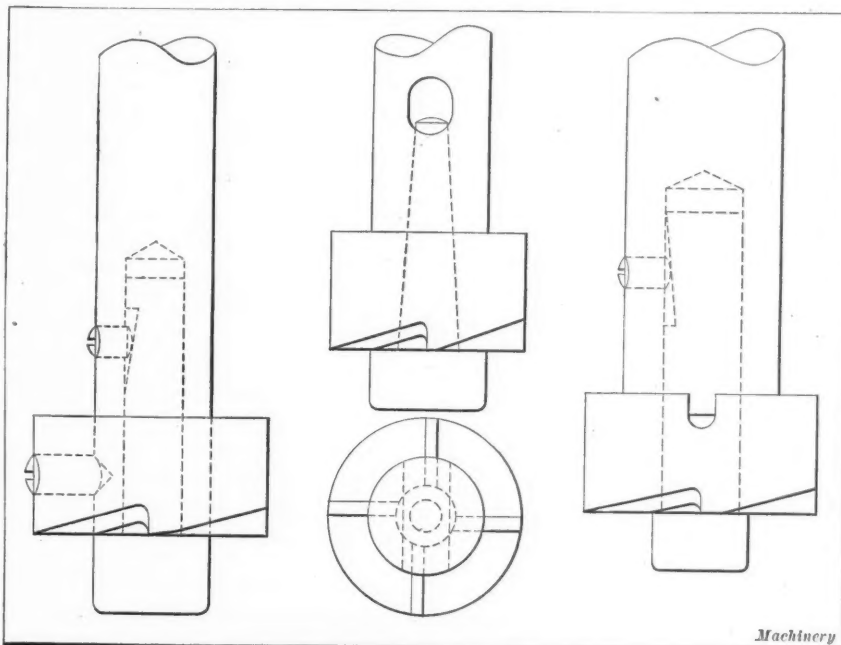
Spot-facing Tool with Interchangeable Cutter
